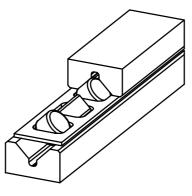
Non-recirculating linear roller bearing, linear guideway, crossed roller type
